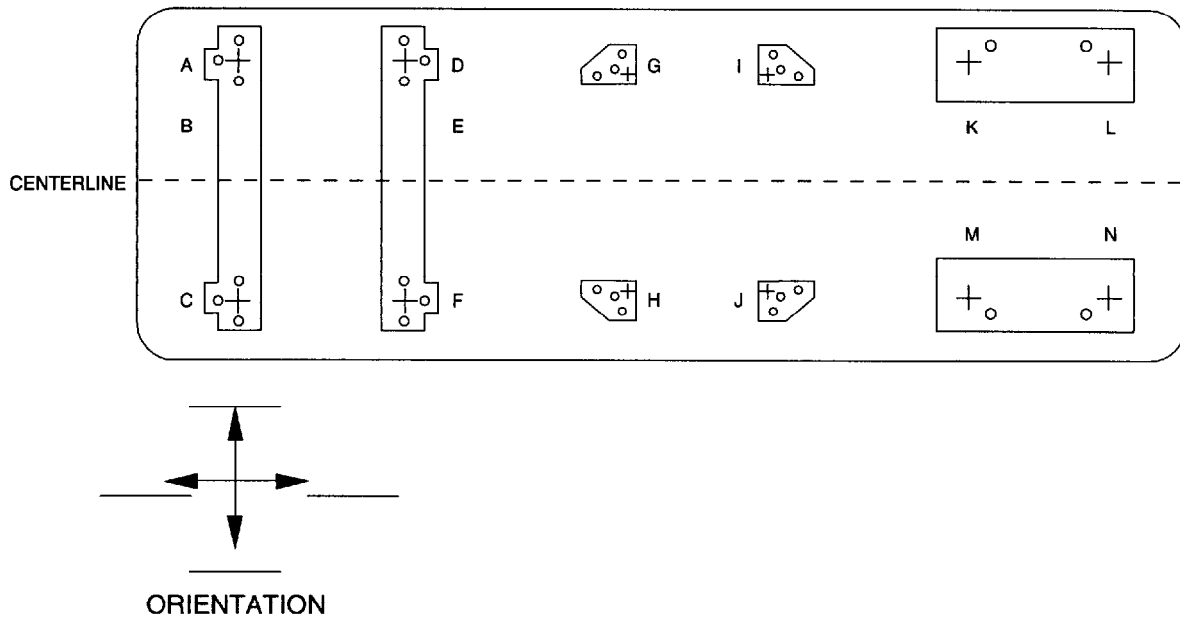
Typical Mounting Plate Layout for Elevation and Level Measurement
